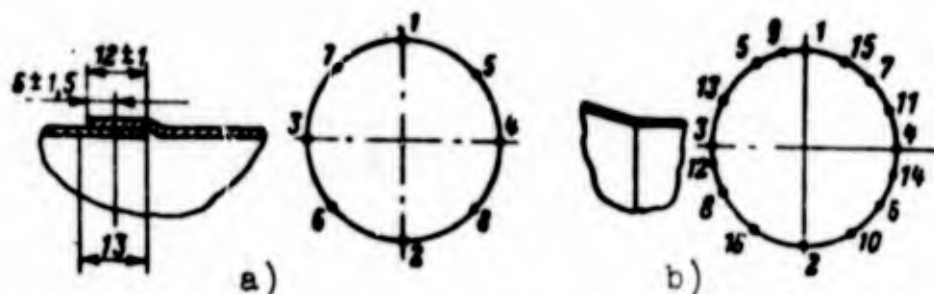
Diagram of location of tacked seams during assembly of separate sections of a welded housing.
